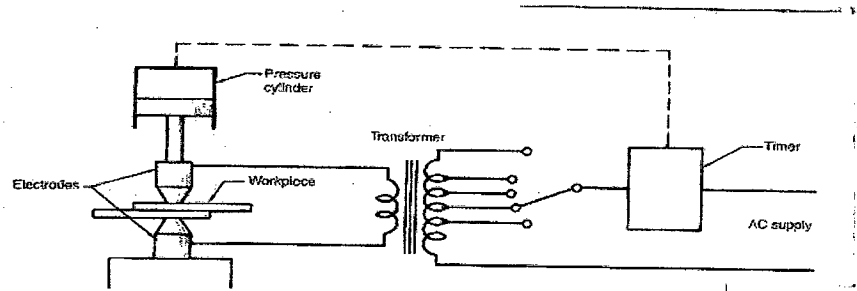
Fundamental resistance welding machine circuits [1].
